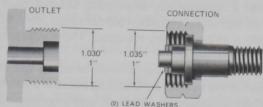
CONNECTION 679 1.030"-14 LH EXT. using Small Flat Seat with Washer
